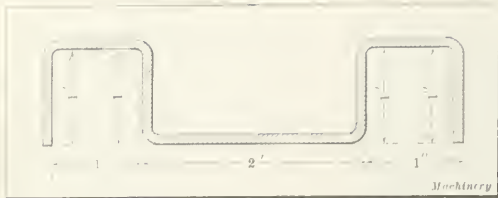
Cross-section of Sheet Metal Bend considered in Second Example
